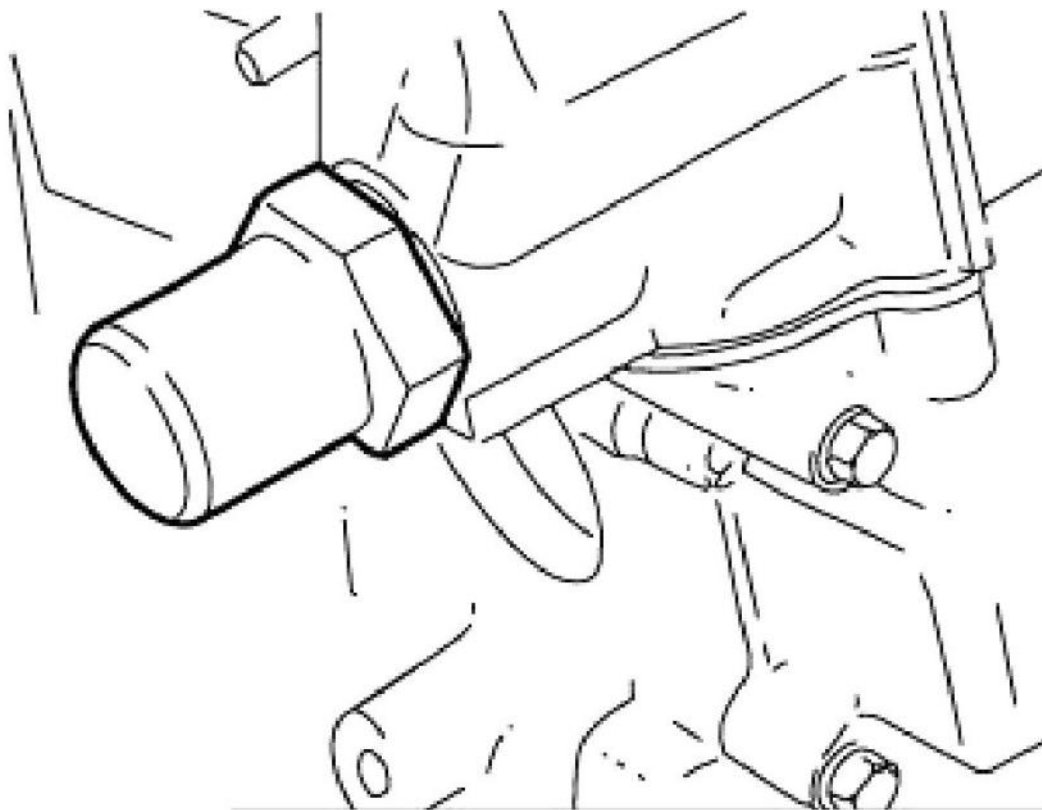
Identifying Cylinder For Chain Tensioning Piston
